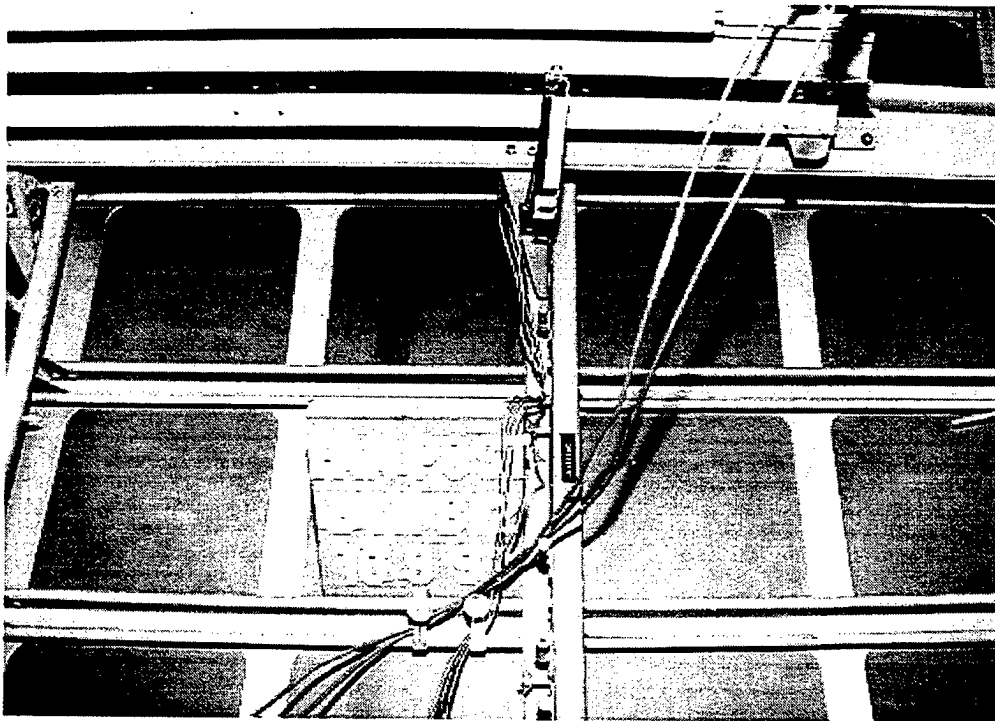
POSTTEST BIN B SUPPORTS 7 AND 8 BOTTOM VIEW
